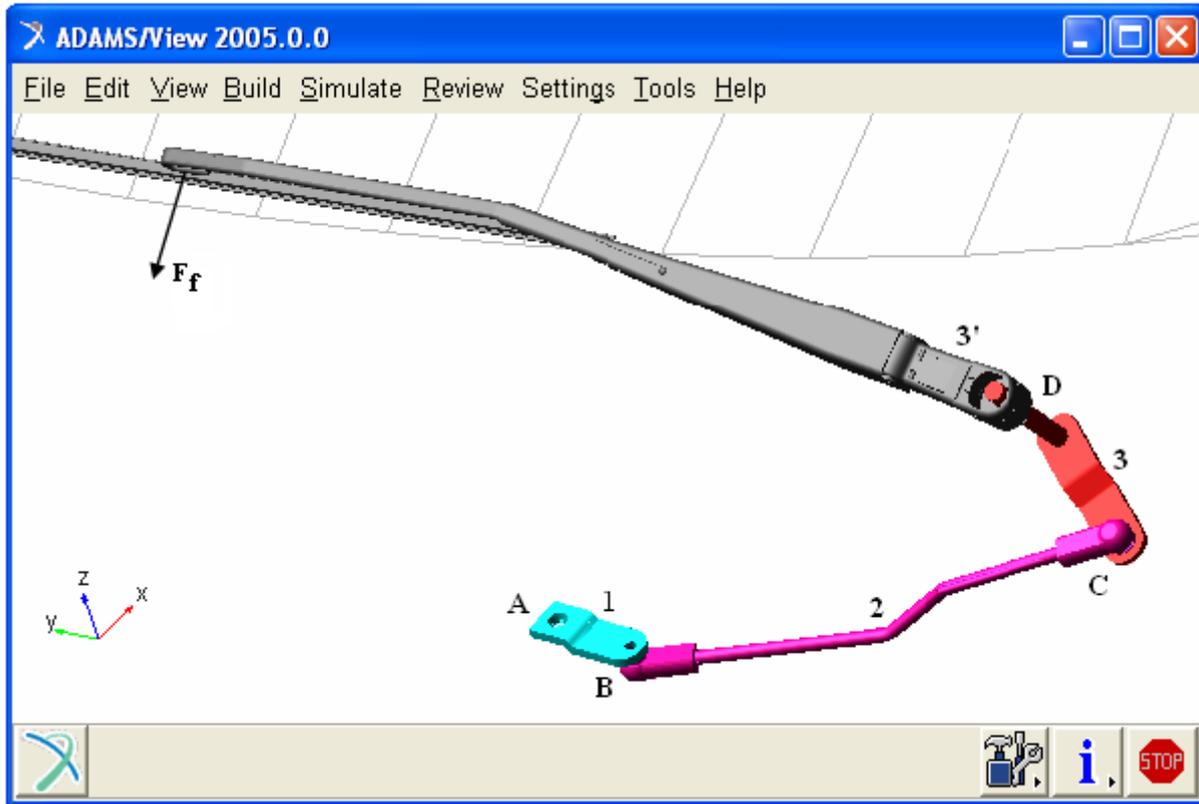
The virtual model of a single-lever windshield wiper mechanism (MSC.ADAMS)
